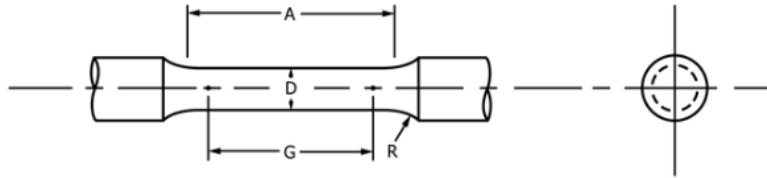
A diagram of the tensile specimen showing the important sample dimensions [50].
